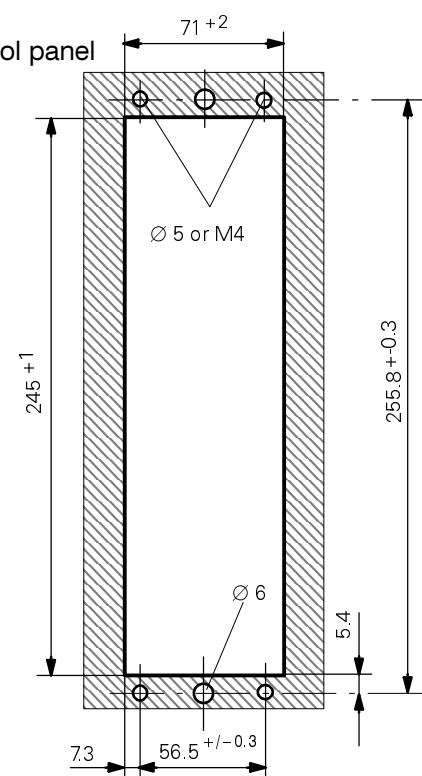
Dimensioned drawing of 7XP20 for panel flush mounting or cubicle mounting (dimensions in mm)
